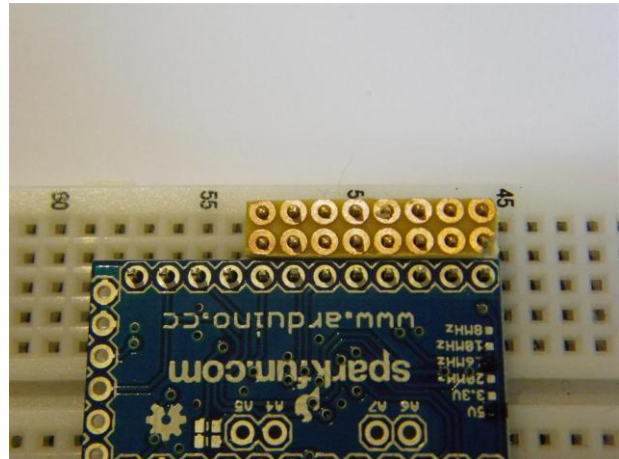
for soldering it is easier to place the whole board on a breadboard to fix all the pins.
